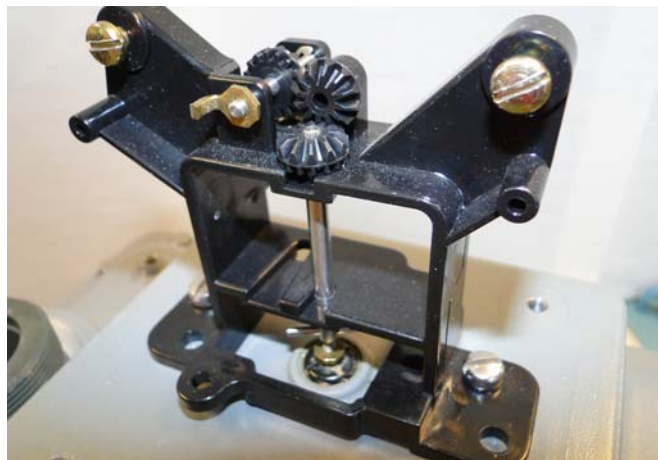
6. Front View of Supported Index Bracket with Index Removed
